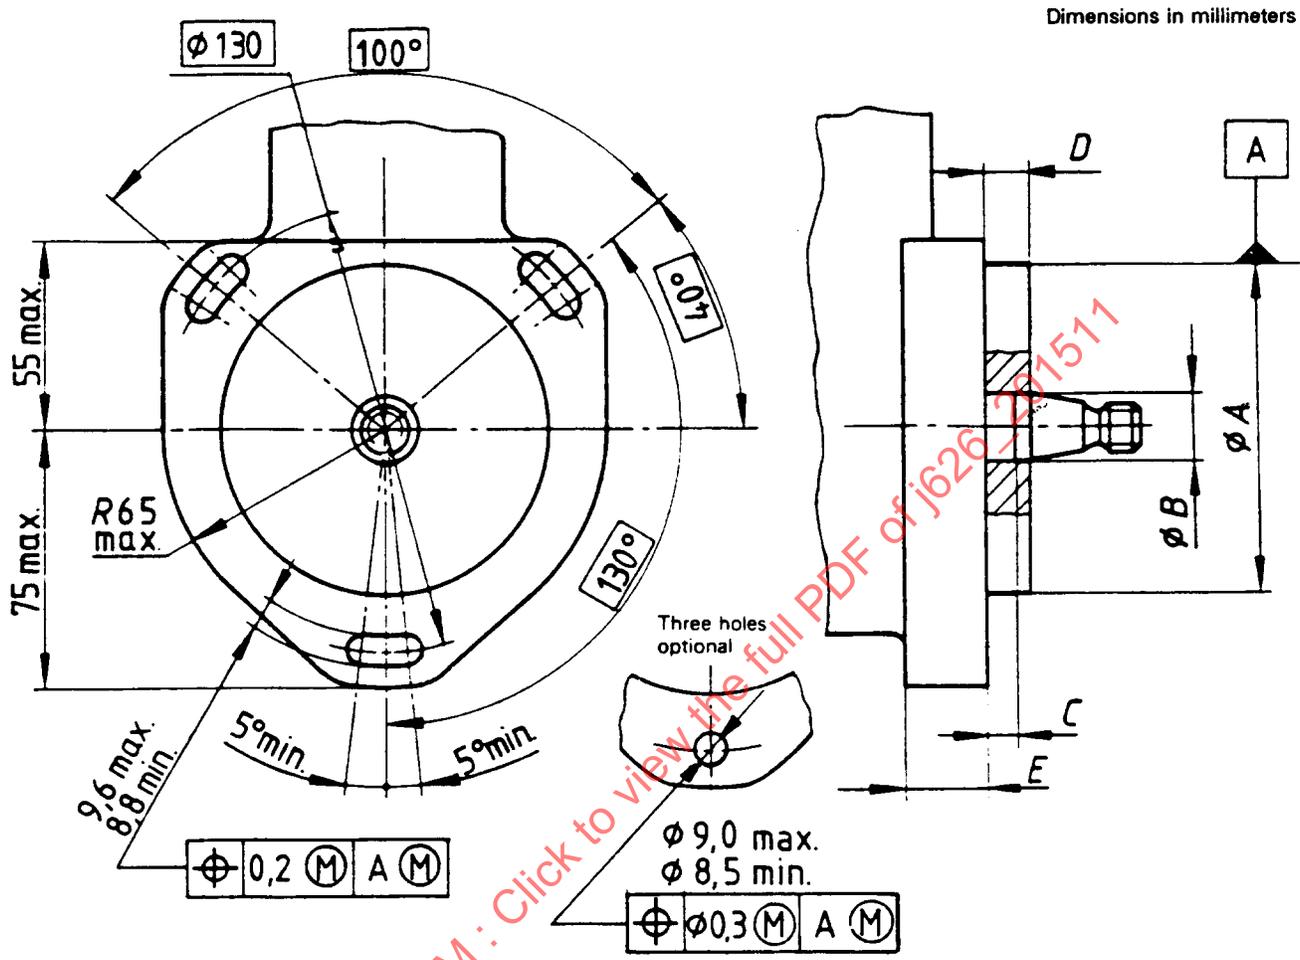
FUEL INJECTION PUMPS — TYPE 6 END-MOUNTING FLANGE
